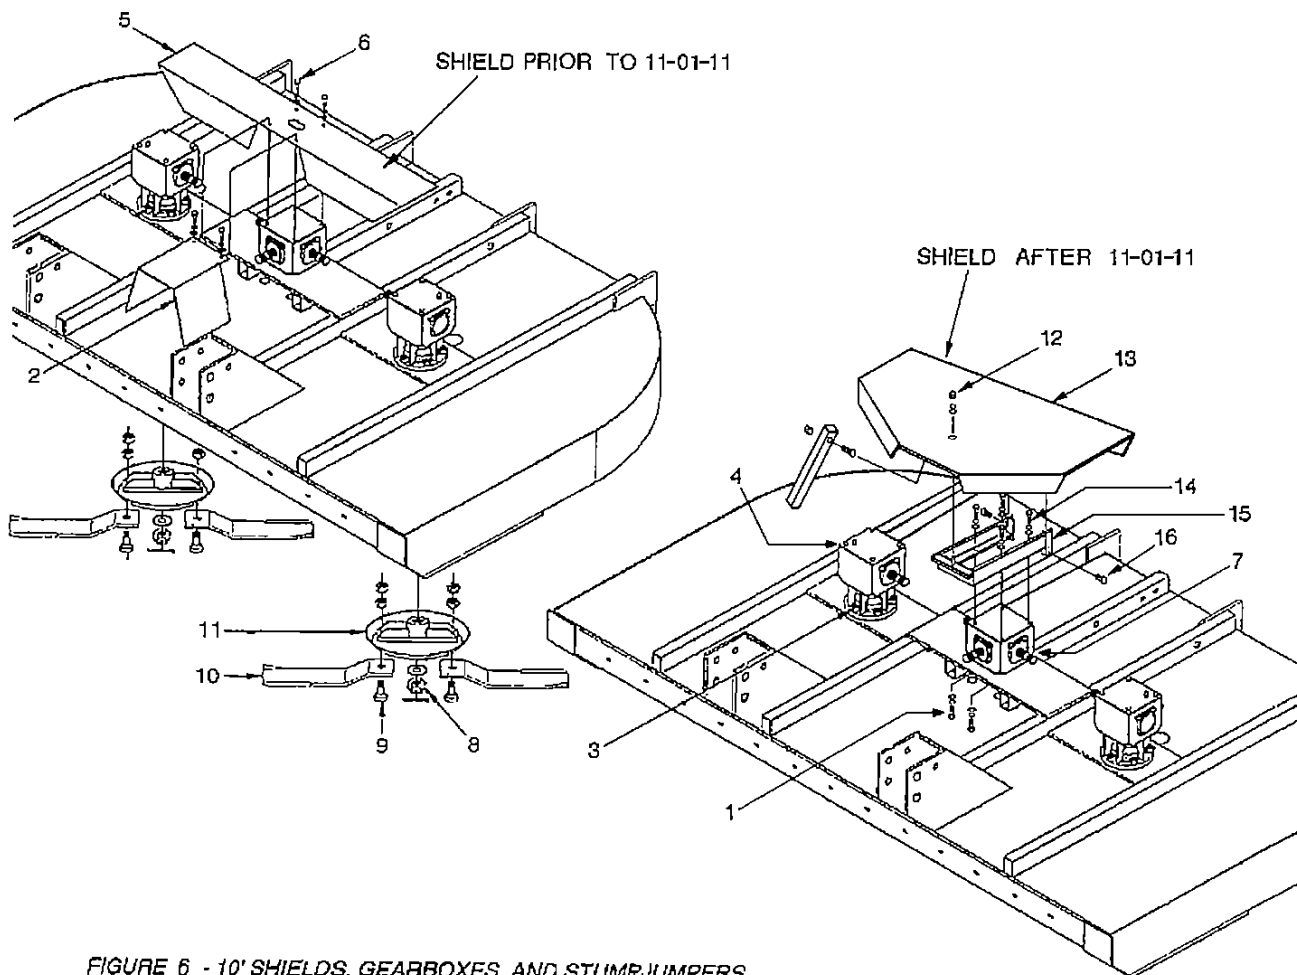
10' SHIELDS, GEARBOXES, AND STUMPJUMPERS
